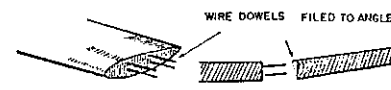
Alternative method of forming dihedral in mainplanes of thick section.
